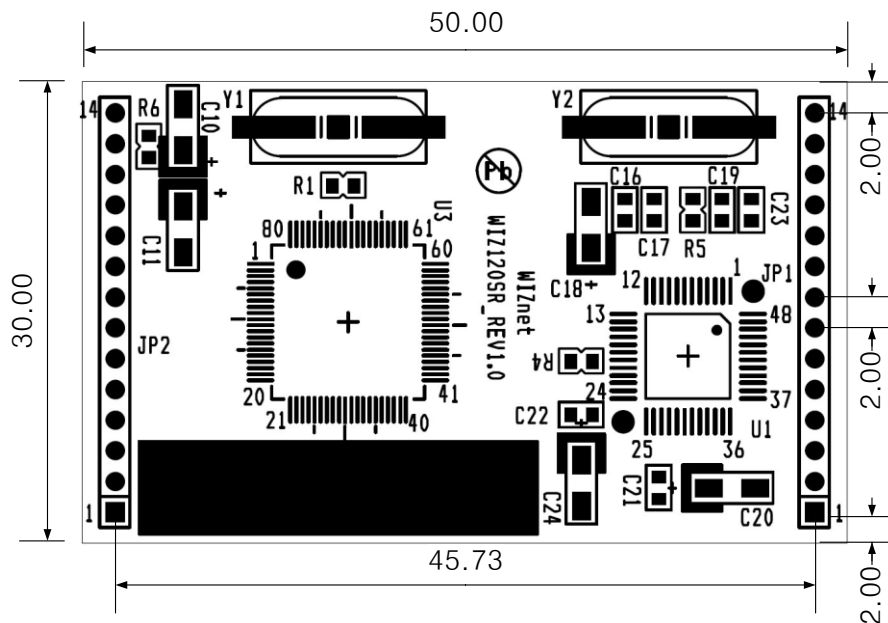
WIZ120SR Board Dimensions (unit : mm)
